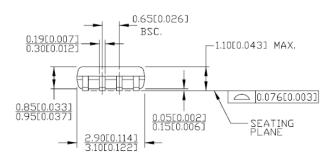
8-Pin Thin Shrunk Small Outline Package (4.40 MM Body) Z8
